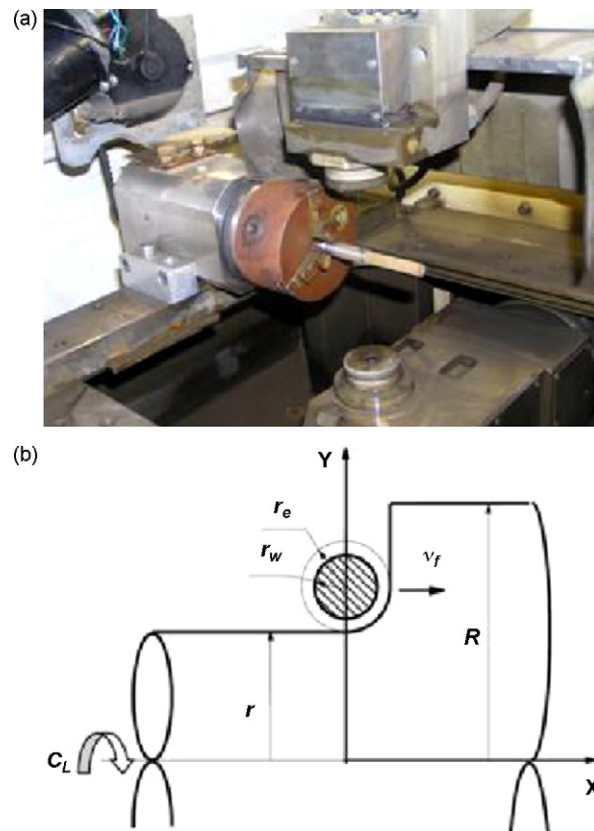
Experimental setup: (a) spindle in five-axis WEDM machine; (b) turning profile.
